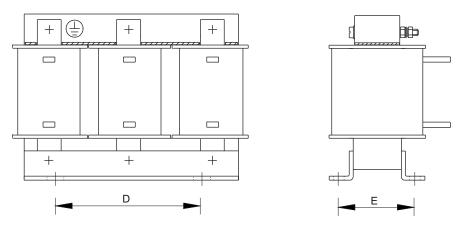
Mounting dimensions of line reactor, frame size FSF
